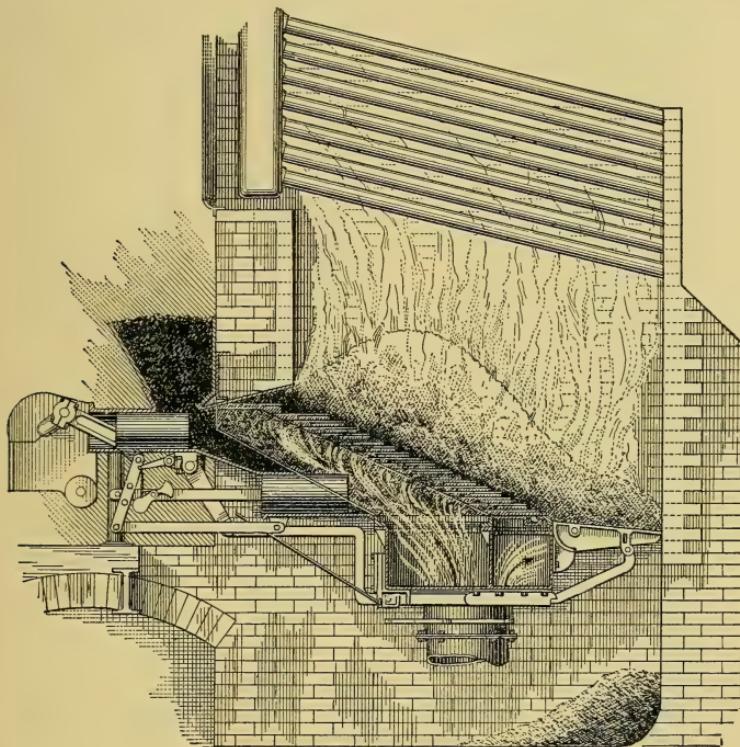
Taylor Stoker Under Horizontal Water-tube Boiler.
